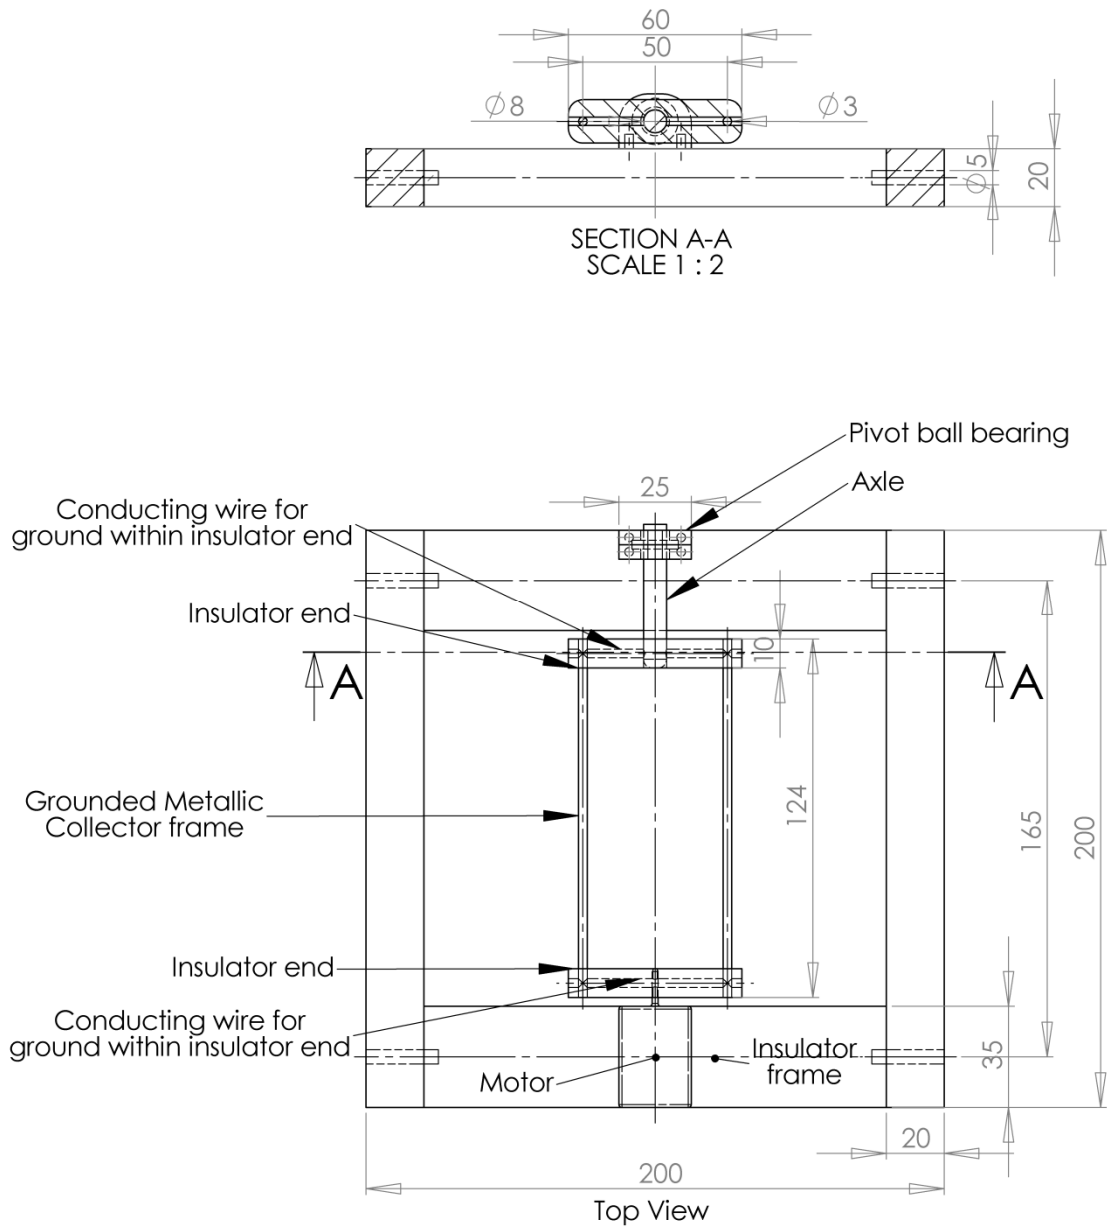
Detailed technical drawing of the rotating frame attachment. Dimensions in mm.
